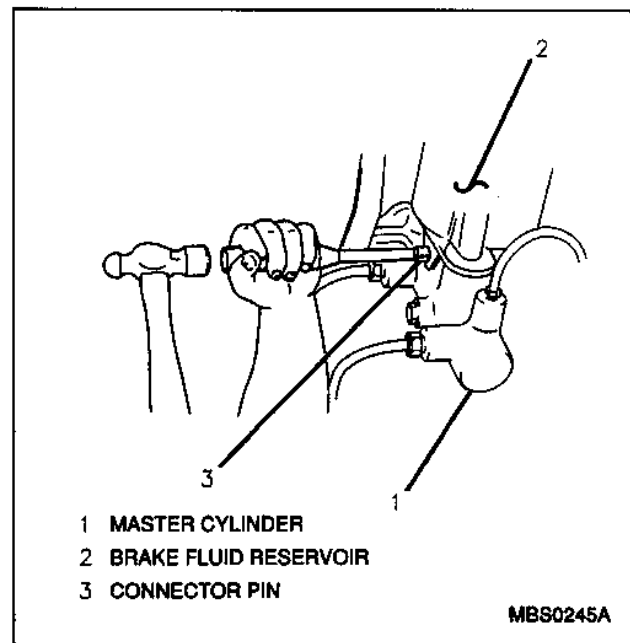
Driving Out Master Cylinder Fluid Reservoir Roll Pin
